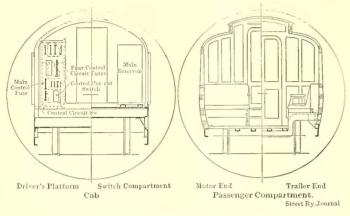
END SECTIONS AND ELEVATIONS OF CAR
